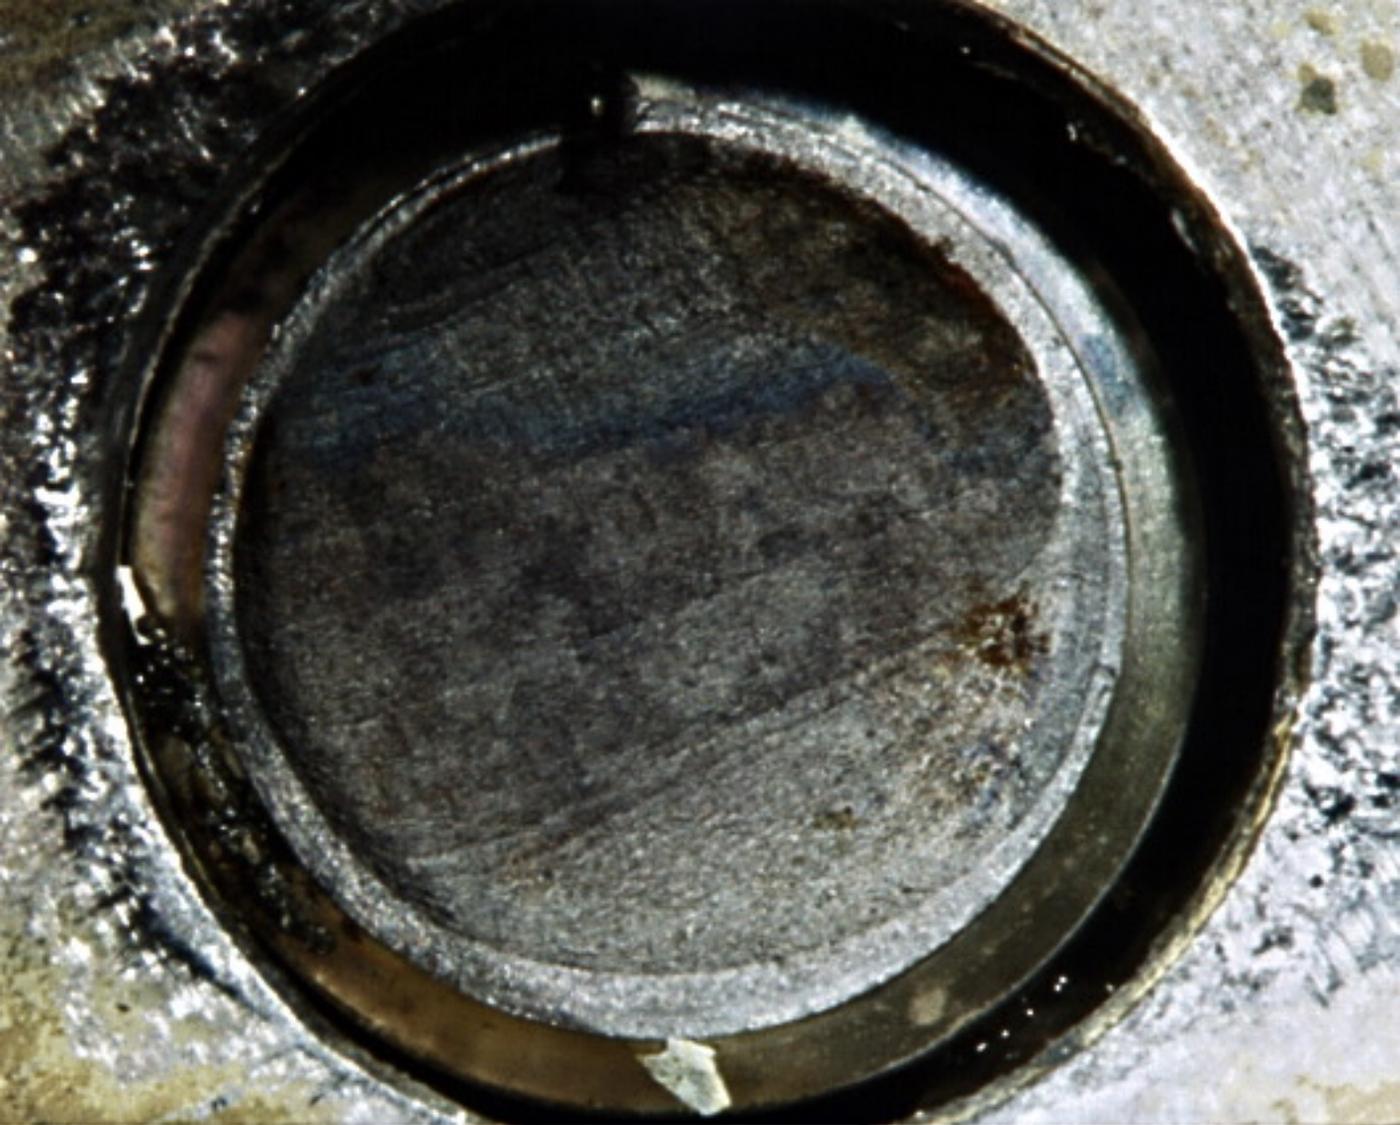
B: Showing fracture surface of lower (threaded) end of tail rotor gearbox upper attachment bolt, with shallow (bright) annular band of initial radial fatigue propagation from the thread root, and secondary bending fatigue striations clearly evident emanating from upper arc, before the final overload failure evident within lower segment of fracture.
